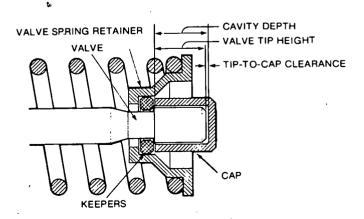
MEASURING VALVE TIP-TO-CAP CLEARANCE
